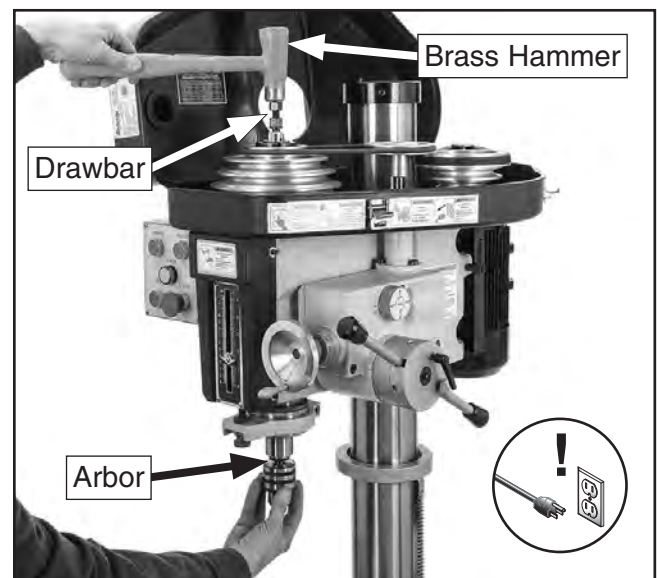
Tapping top of drawbar with drawbar nut already loosened to remove tooling.
